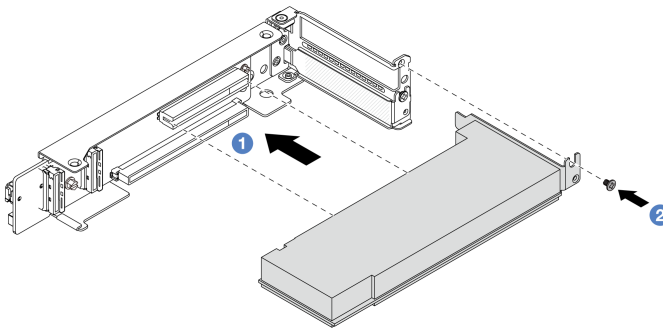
Installing the PCIe adapter to the 4LP riser 3/4 assembly
